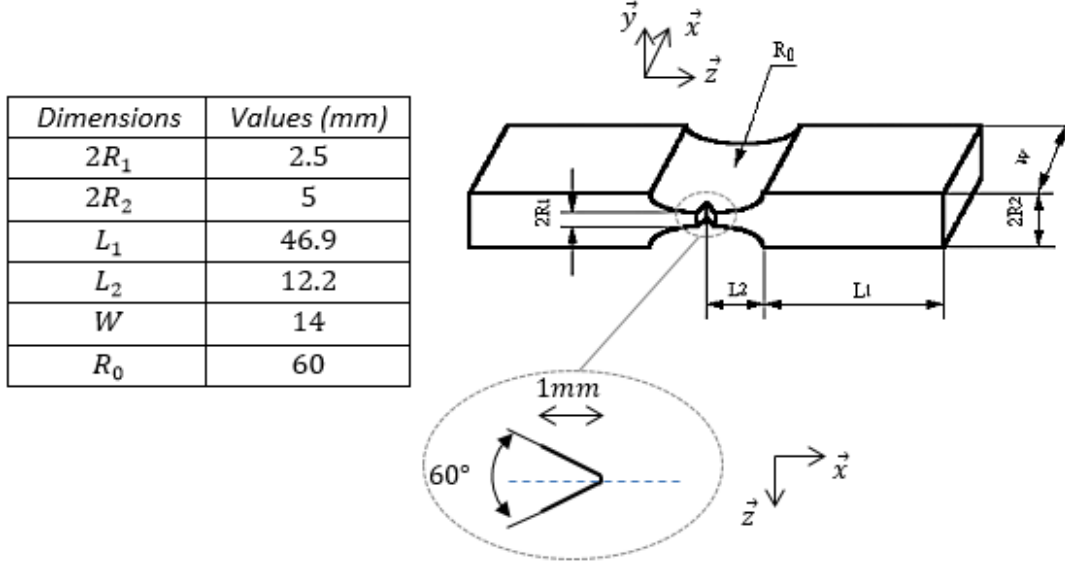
Computed dimensions of the specimen used during the ultrasonic fatigue crack growth tests. The geometry shape is that of [Wu and Bathias, 1994].
